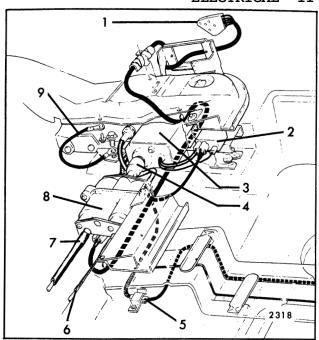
Four-Way Bench Seat Wiring -"A" Body Styles
